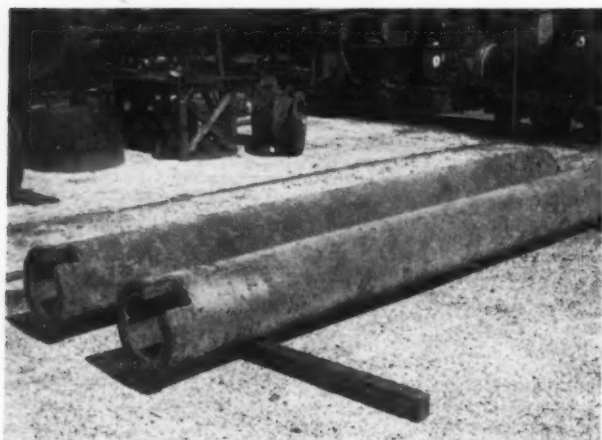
AS-CAST CENTRIFUGALLY CAST CARBON-STEEL SHIP SHAFT WITH PLUGS REMOVED FOR TEST SPECIMENS
